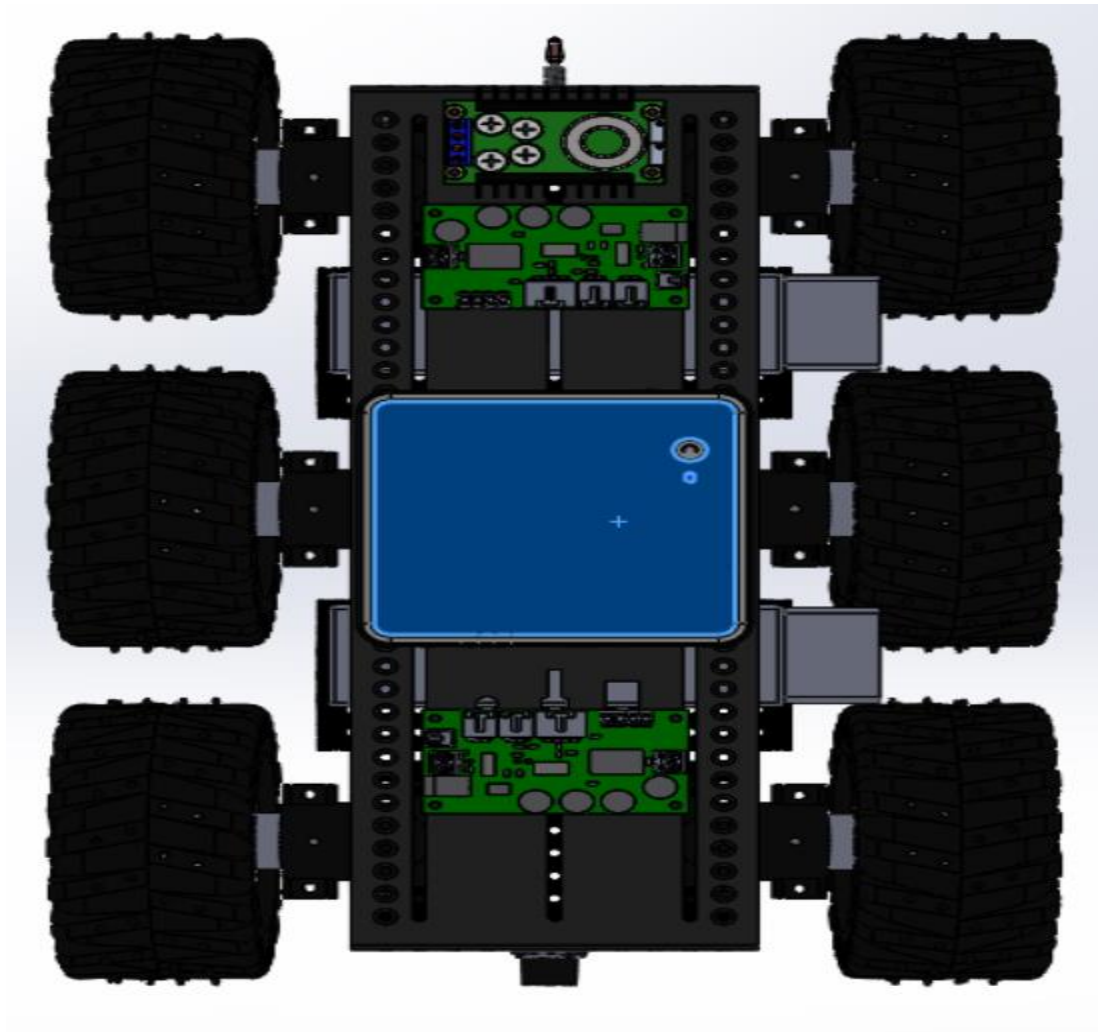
Top view of 3D Rover Assembly (Dead Reckoning)
